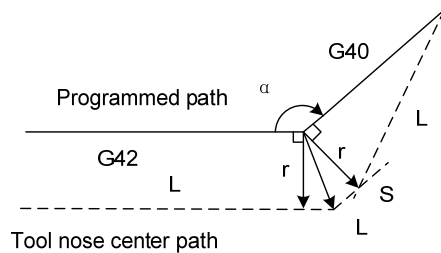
Circular-linear (moving outside and canceling offset)
